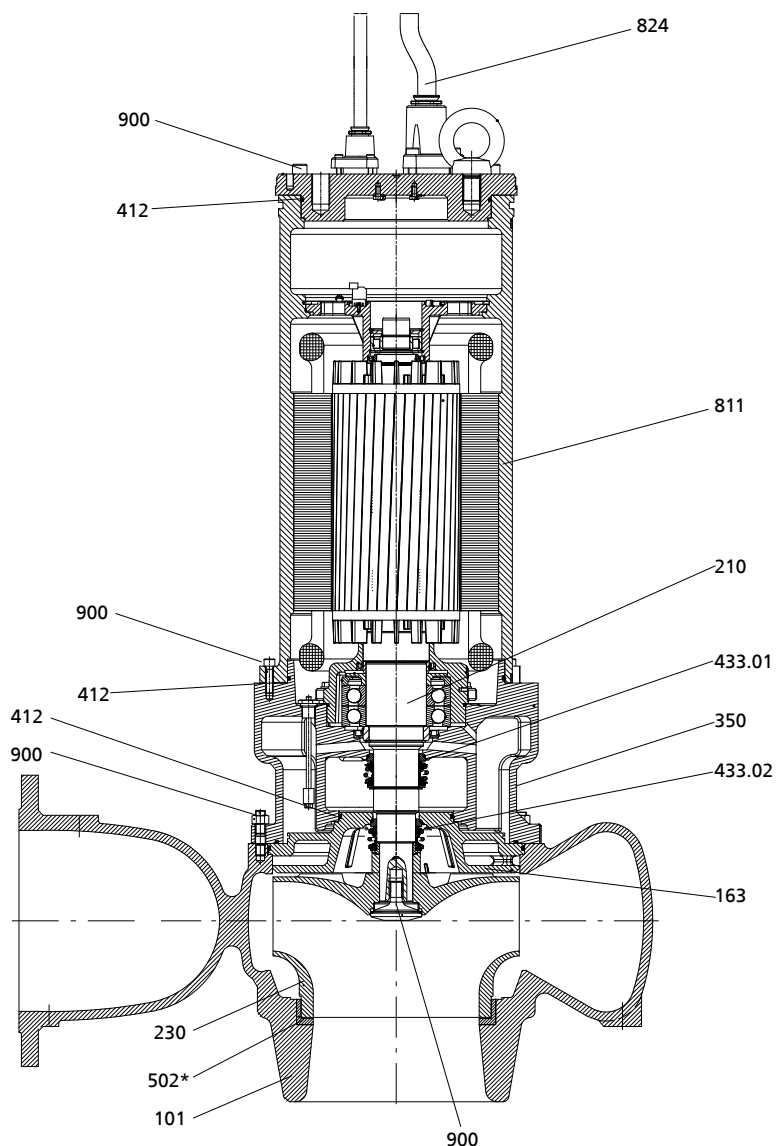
General assembly drawing, example: Amarex KRT K 150-403 / 130 4 XNG-S without cooling jacket
